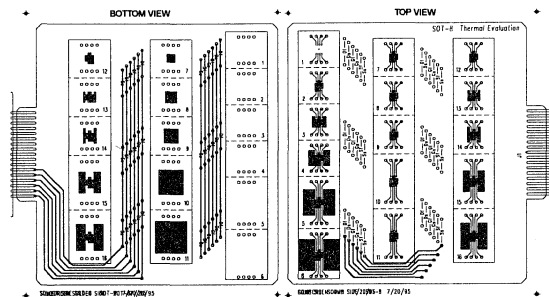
Both Sides of the 4.5"x5" SuperSOT™-8 Thermal Board. Complete scale drawings is shown in section 5.
